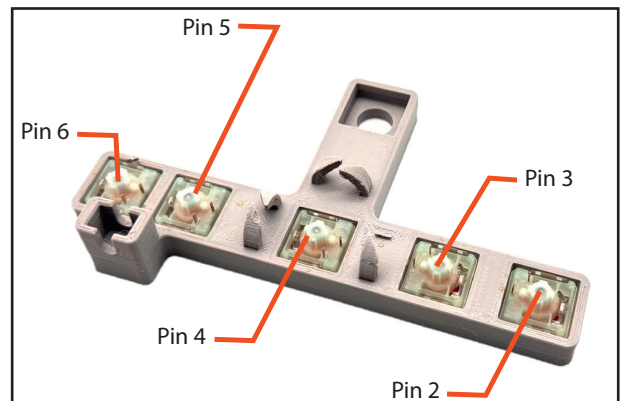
Setup in Key-Soldering-Jig for 5 keys.
